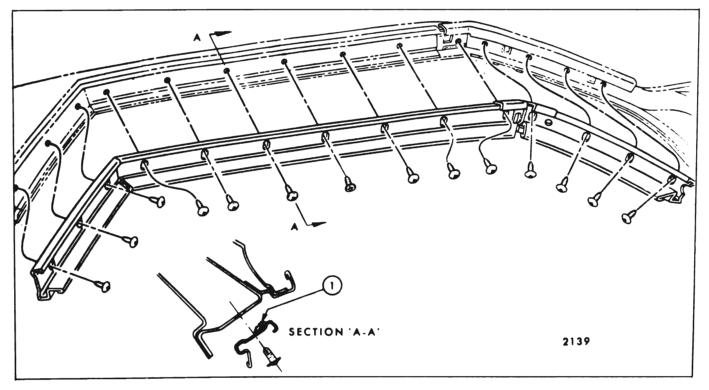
Side Roof Rail Weatherstrip Retainer - All ''17-37-39-57'' Styles & ''B-87'' Styles
